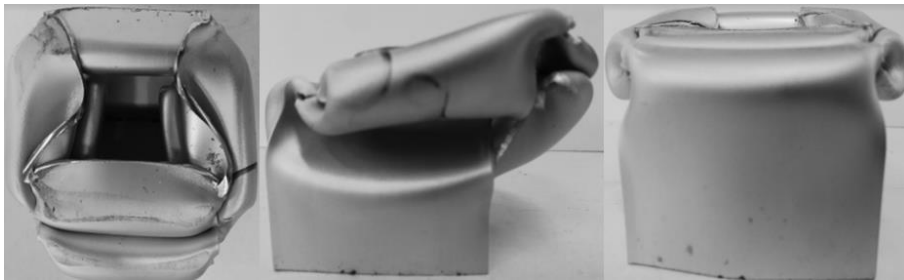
Final views of crushed specimen in test 3a under contact in edge
